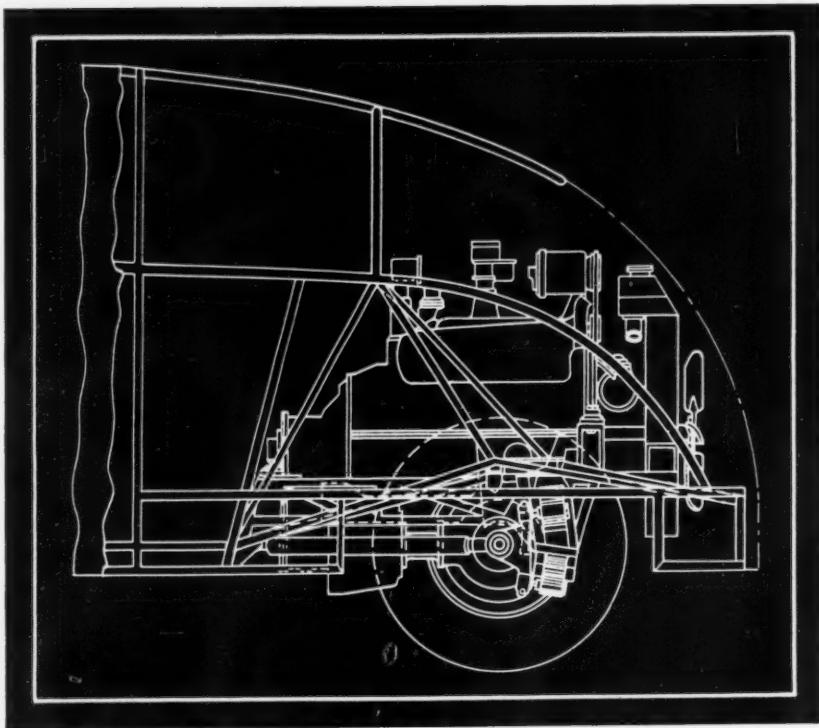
In rear-driven Scarab car, engine is mounted above differential and vertical drive is employed from the clutch to the transmission
